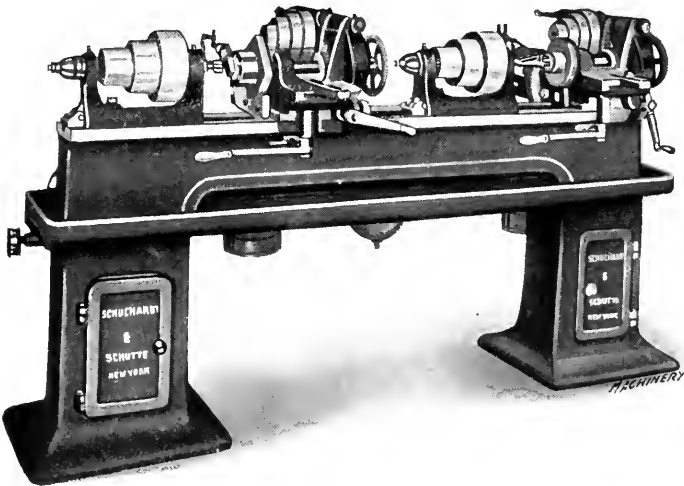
Schuchardt & Schutte Duplex Automatic Profile Milling Machine
